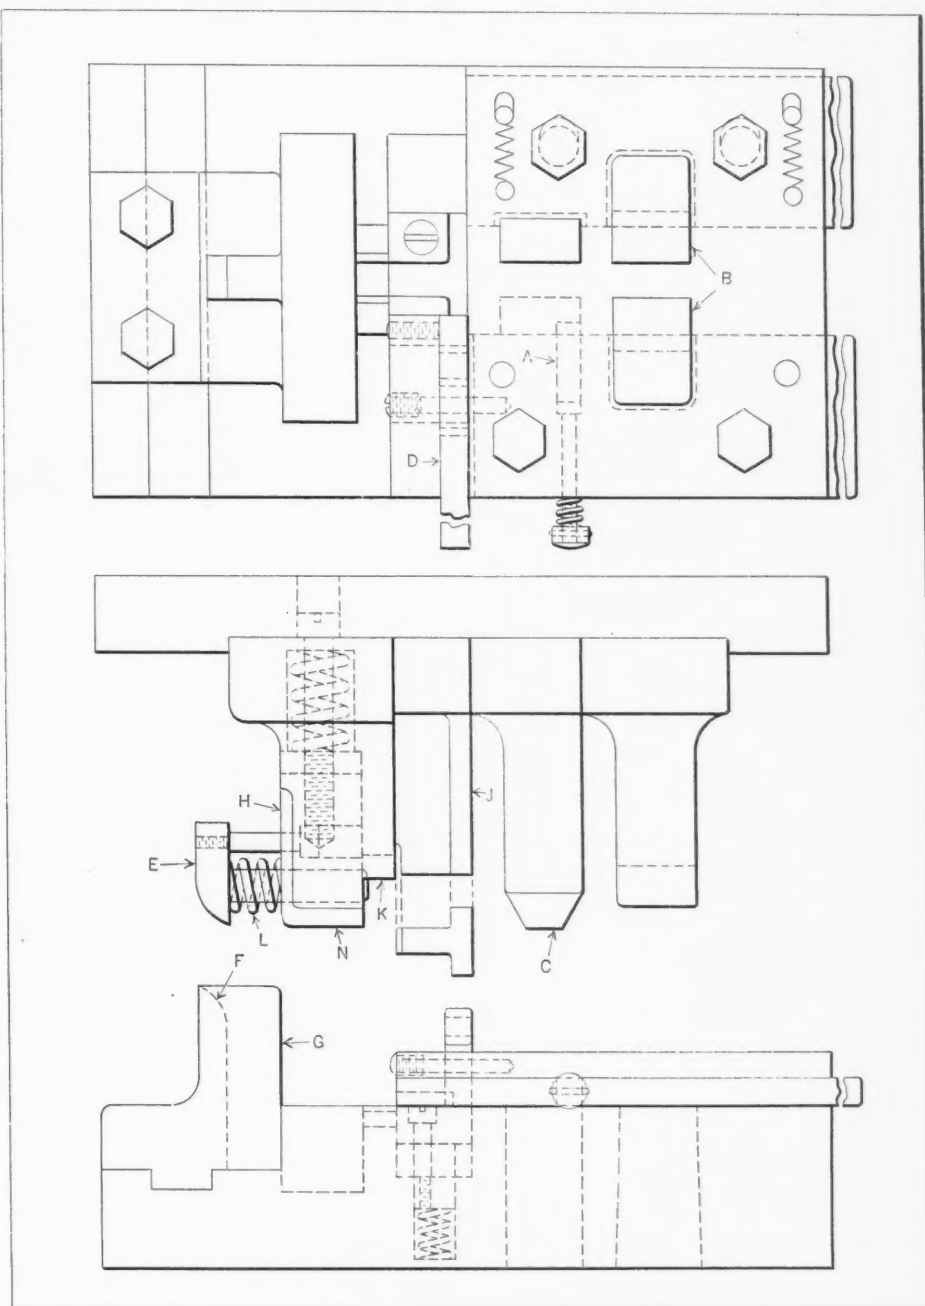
In this Die the Clip Shown in Fig. 1 is Blanked and Formed to a Cylindrical Shape at One Stroke of the Press
